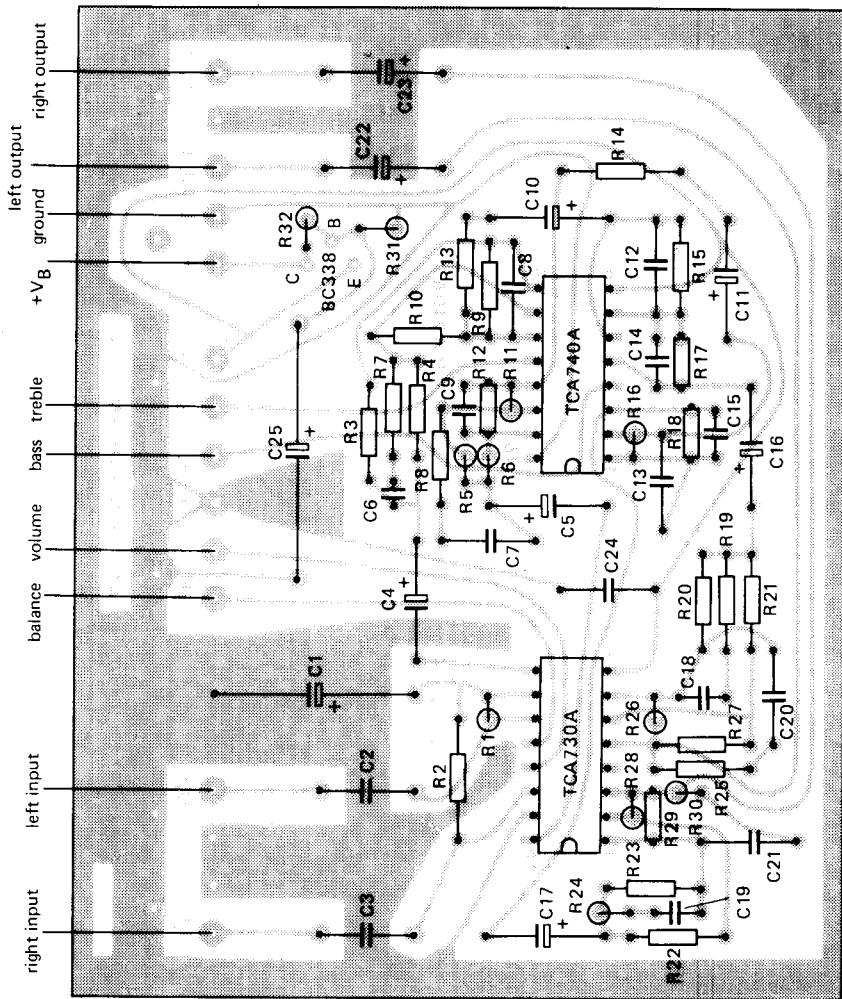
Printed-circuit board component side, showing component layout; for circuit diagram see Fig. 7.
